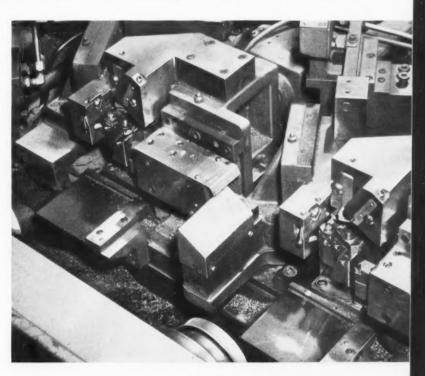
Four angular oil-holes extending through the hub of each vane carrier are counterbored and drilled on this twelve-station rotary indexing machine.
